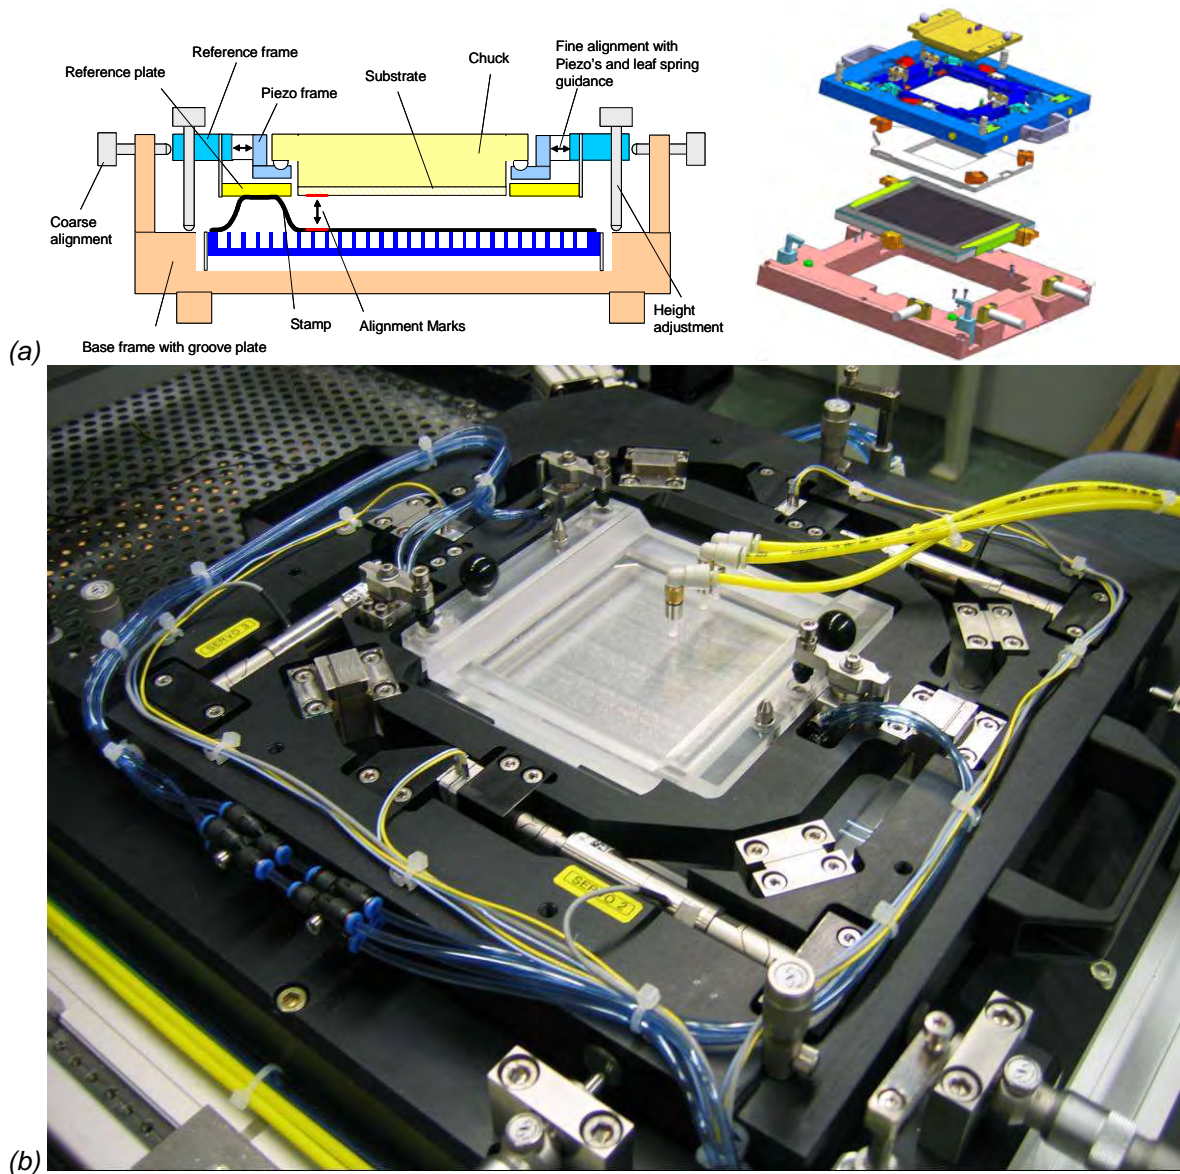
(a) Schematic cross section of the SCIL setup and exploded view of the complete assembly with from bottom to top: ground frame, groove plate, quartz reference plate, base frame and quartz chuck. (b) Photograph of the SCIL setup with piezo feedback controlled quartz chuck. The chuck position is controlled by piezos with respect to the black aluminum frame. The distance between the two frames is measured using a capacitive sensor on the symmetry axes of the chuck where it is actuated.
